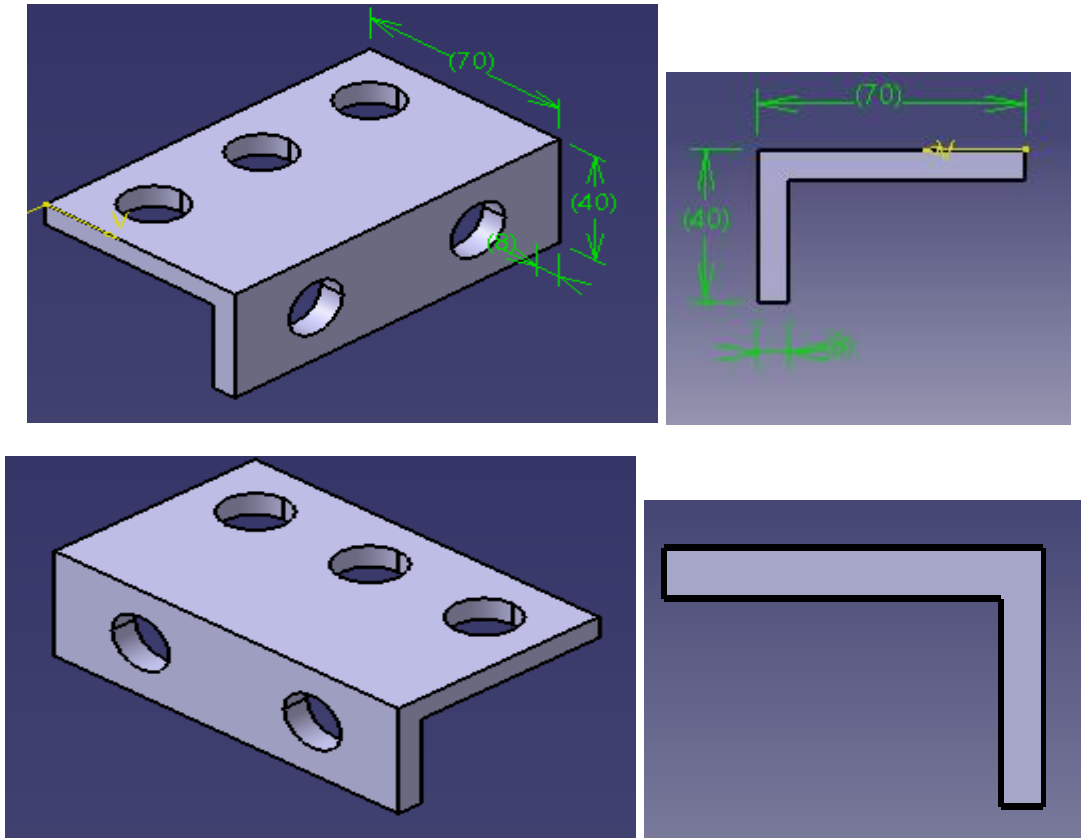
Dimensions of clamp (left side) & 3D model of Top plate/ clamp (right side)
